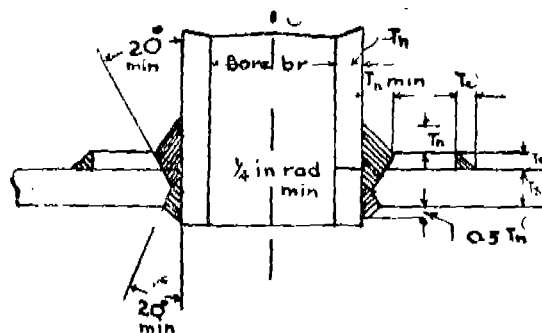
MINIMUM WELD ATTACHMENT FOR STAND PIPES OVER 5" BORE
